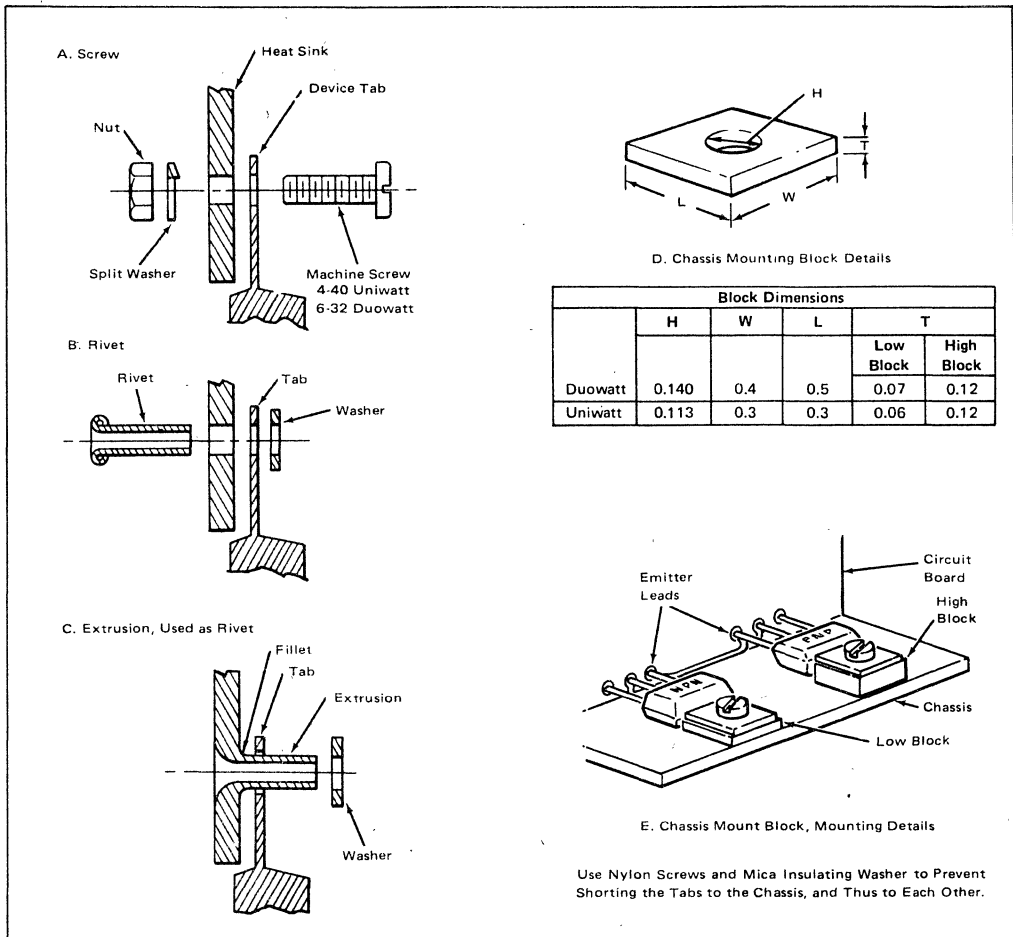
Methods of Mounting Duowatt and Uniwatt Transistors to a Heat Sink
